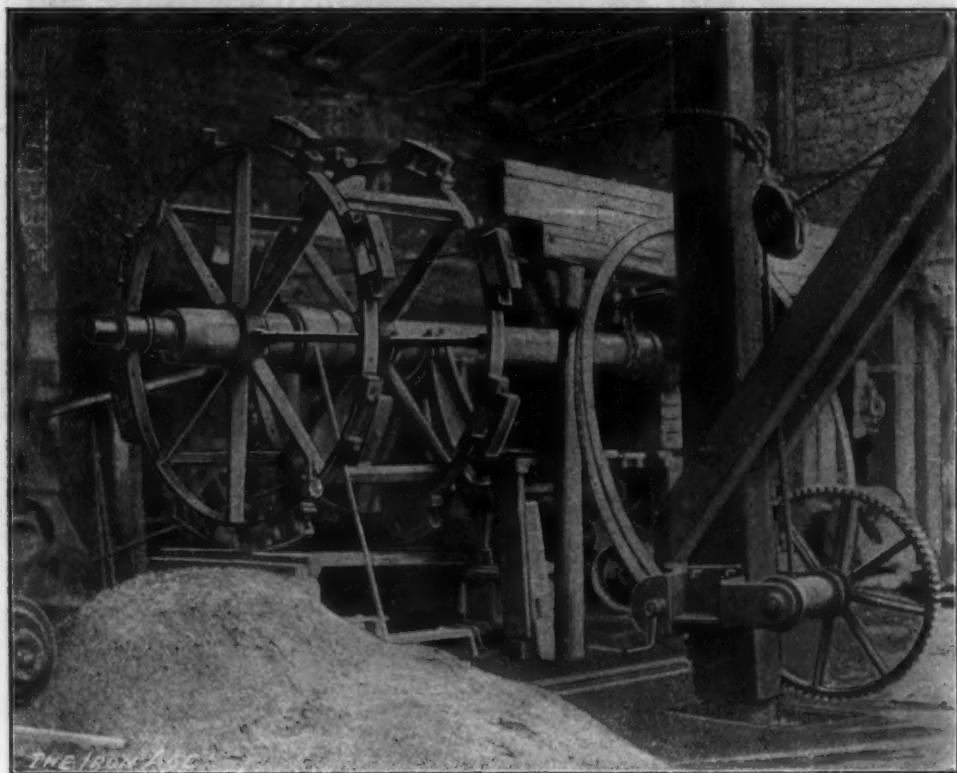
Cylinder Boring Mill with Which the Traveling Crane, Fig. 15, is Used.
